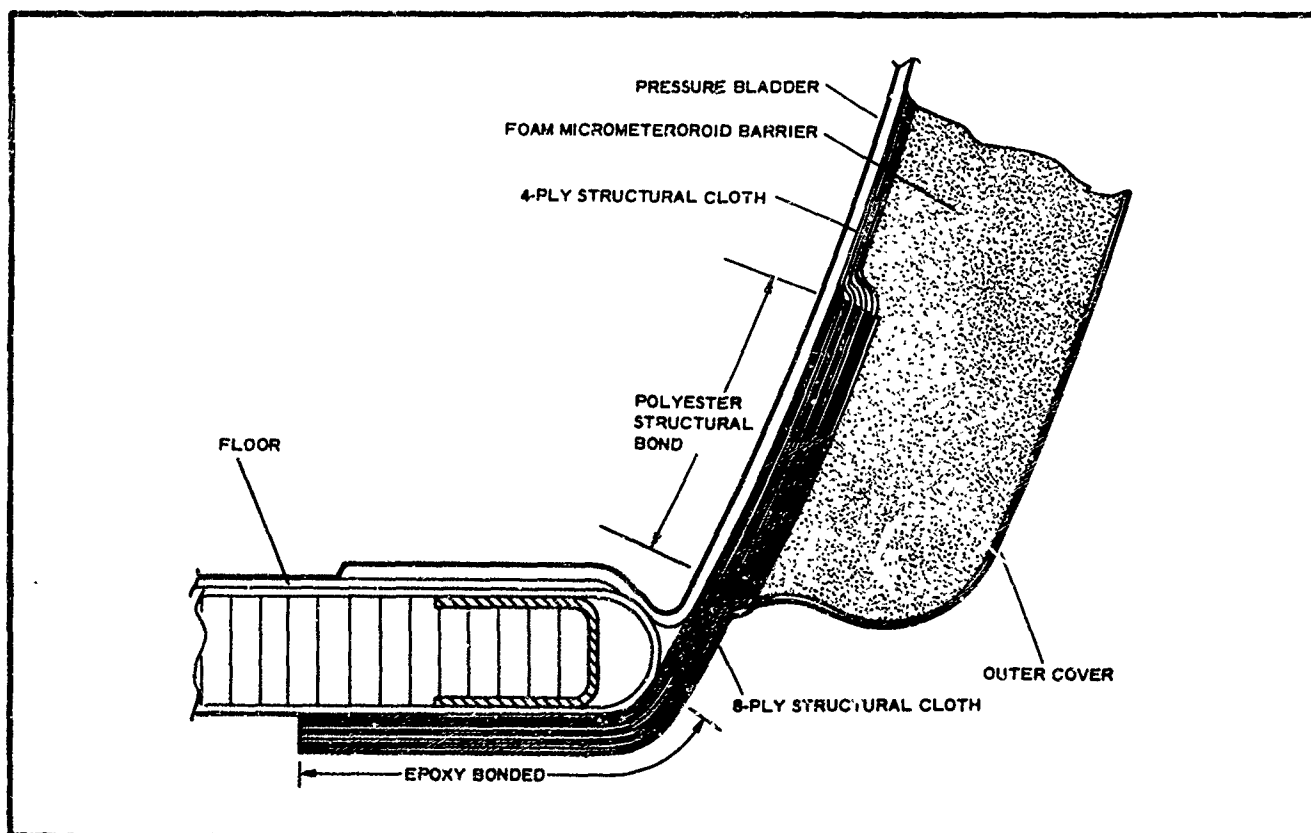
Structural Joint Between Expandable Wall and Rigid Floor
